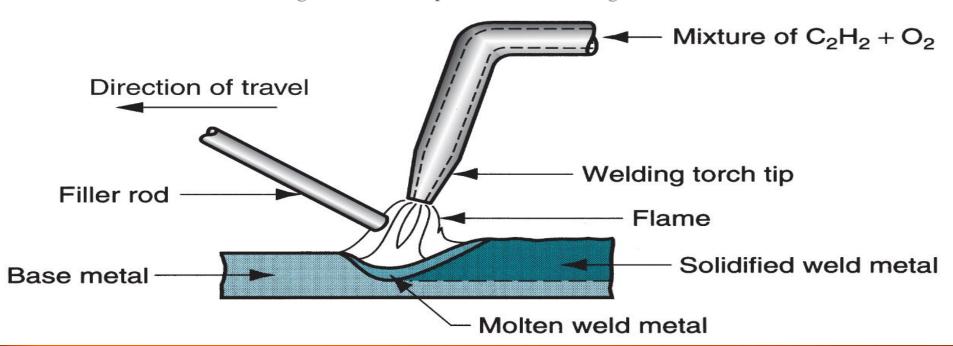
Blow Pipe Used in Gas Welding
